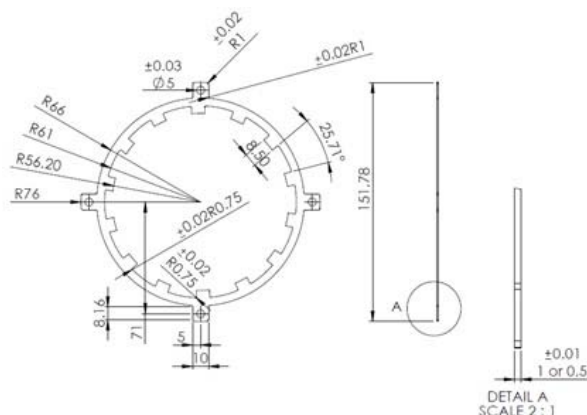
Design rotor of 12S-14P OR-HEFSM (All units in in mm).
